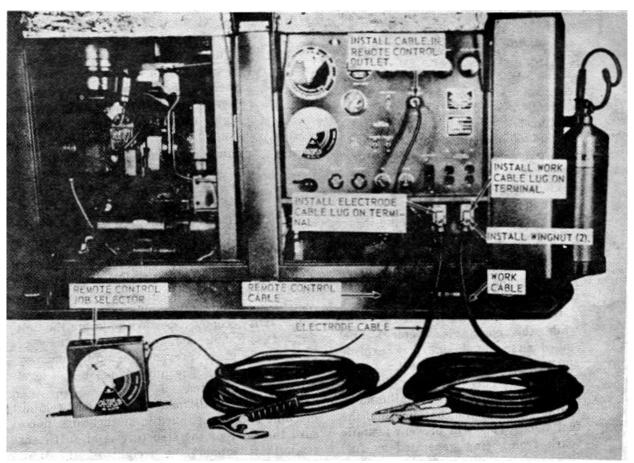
Welding cables and remote job selector, removal and installation.
